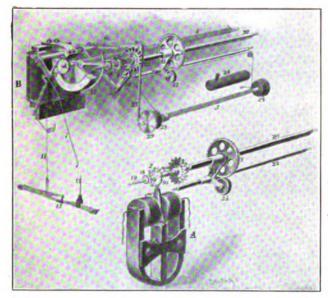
TYPE WHEEL POSITIONING MECHANISM AND ESCAPEMENT.
